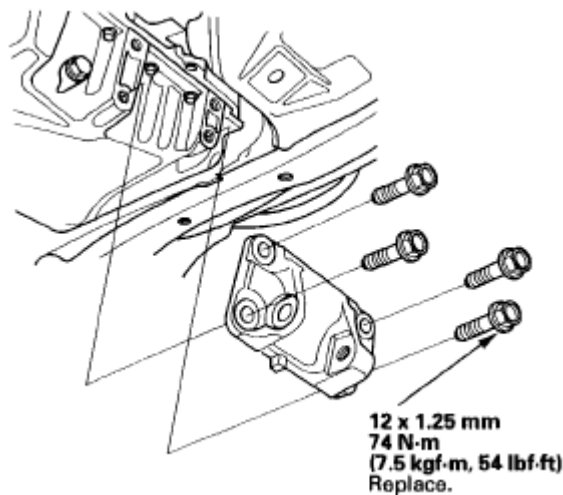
Identifying Transmission Mounting Bolts And Clutch Cover With Torque Specifications
